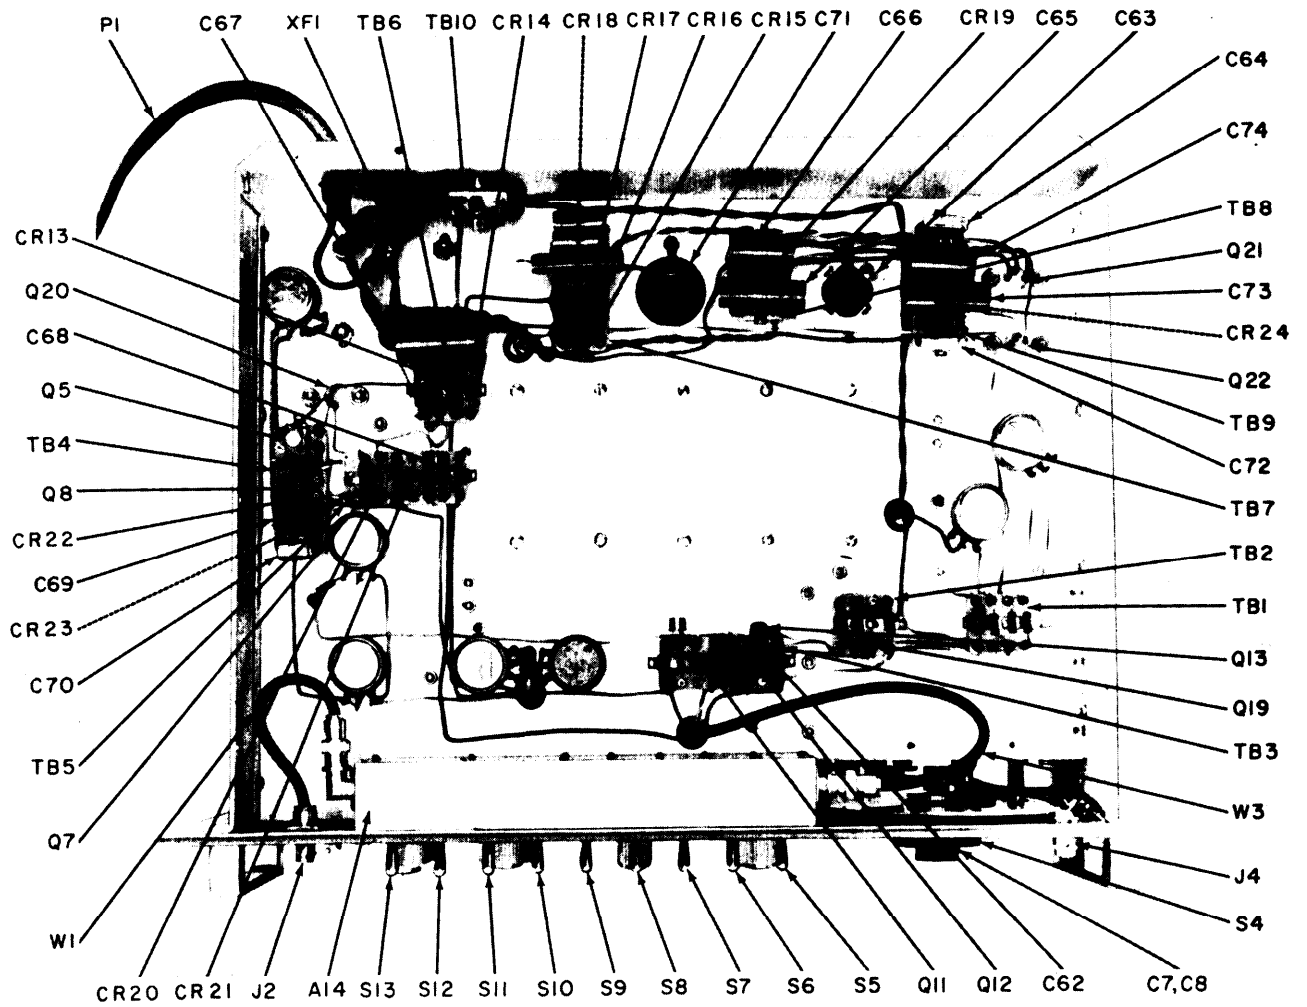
Pulse Generator Assembly, Bottom View, Nonresistive Components.
